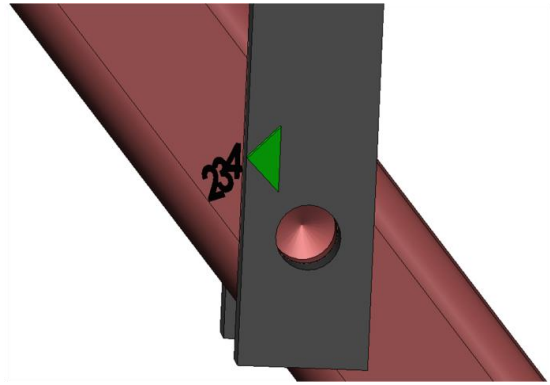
Below the arc slider is a bolted connector block to which the guidance tube is mounted. The tube can adjust its pitch and then lock in place with the studded knobs. Surgical tools are passed through the center Ø5 mm hole of the tube and the side view of the tube shows how to measure pitch angle by lining up the numbers on the guidance tube with the arrow on the holder.
